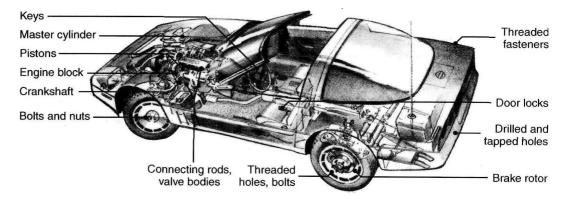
Typical parts on an automobile that require machining operations to impart desirable surface characteristics, dimensions, and tolerances.
